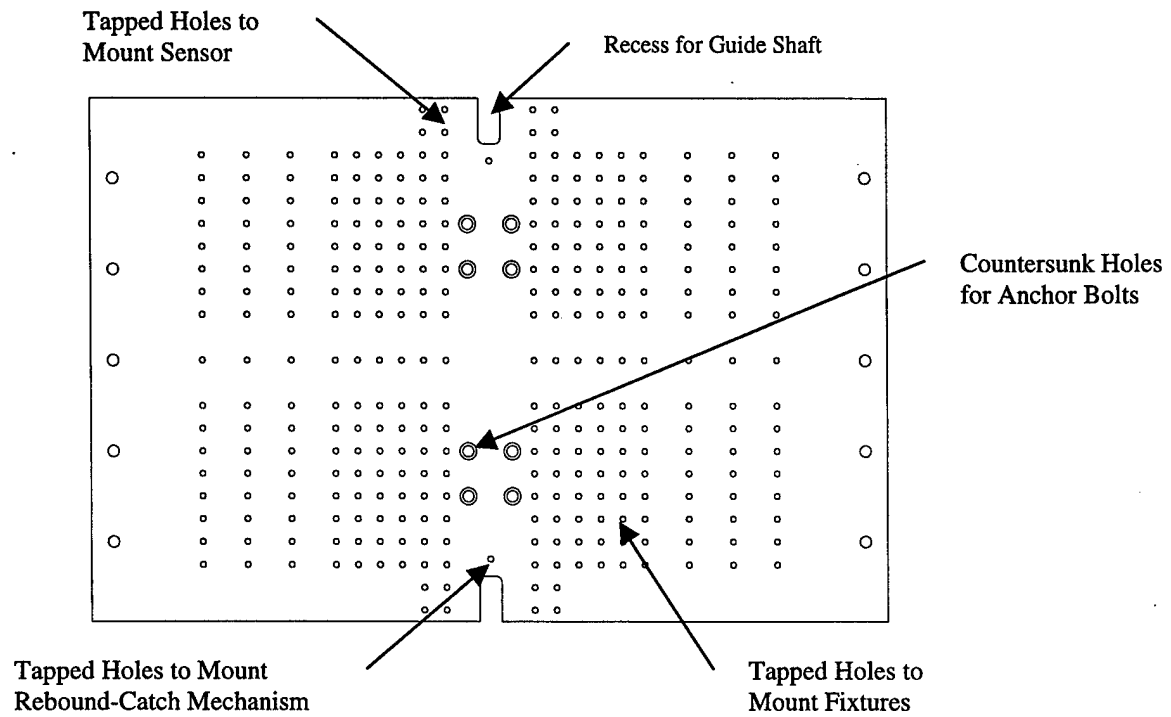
DETAILS OF THE BASE PLATEN USED FOR MOUNTING FIXTURES AND SENSOR ACCESSORIES
